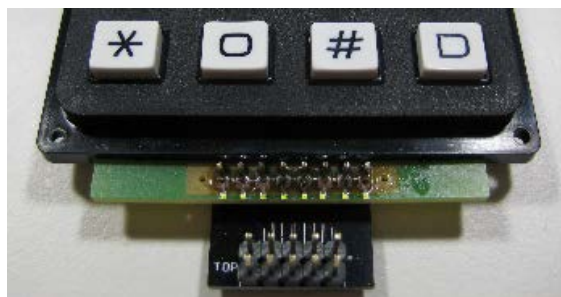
Solder male header into the keypad breakout board, then to keypad itself.
